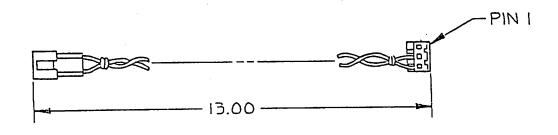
Battery Extension Harness Assembly (Item 221)
